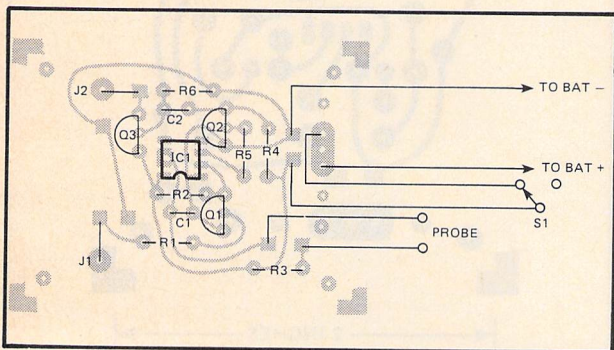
THE COMPONENT SIDE of the printed circuit board is also the panel for the BioBox. Parts placement and locations are shown here.
